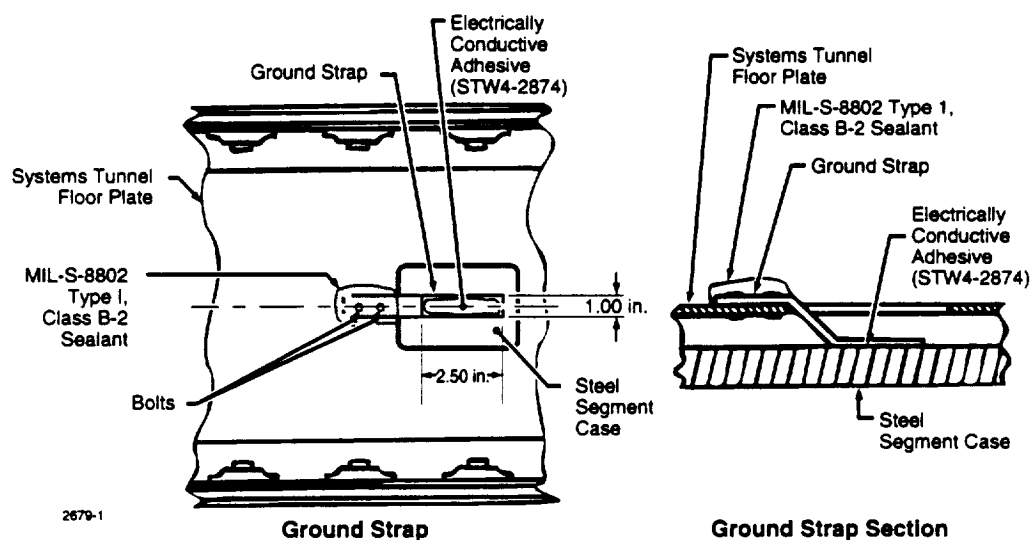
Systems Tunnel Floor Plate Assembly Ground Strap
